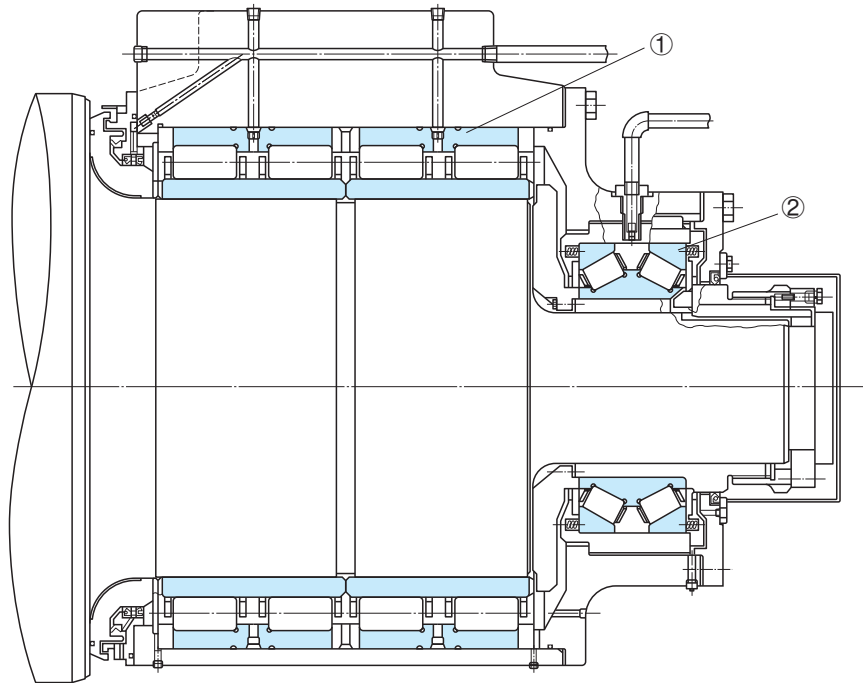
Back-Up Roll Chock Assembly, Cold Strip Rolling Mill
